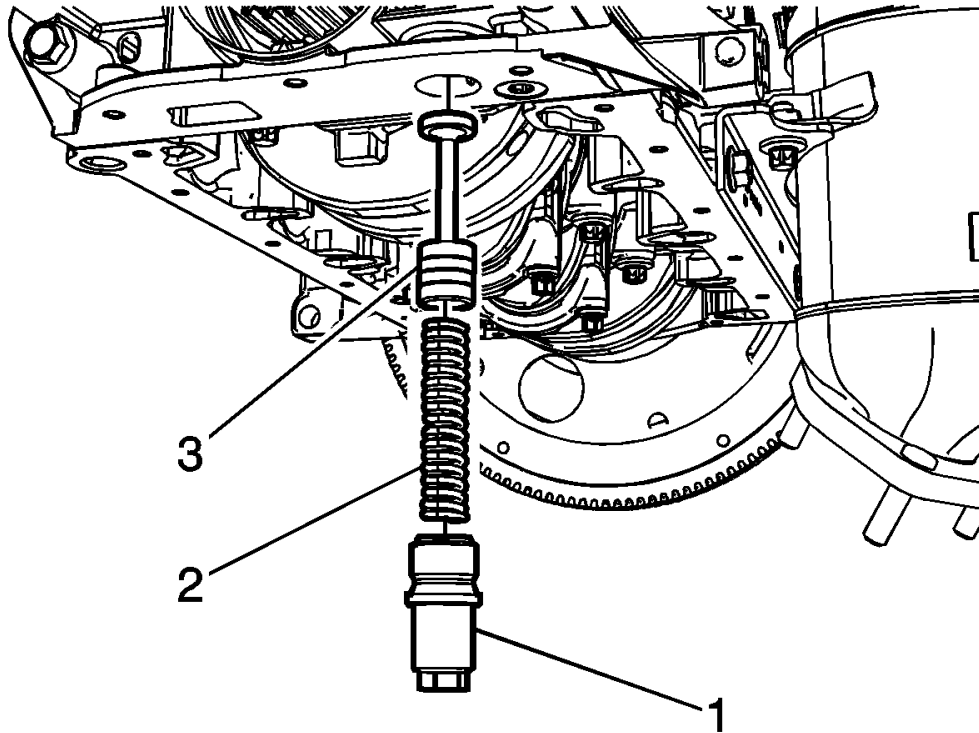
Oil Pressure Relief Valve Plug, Spring & Piston (Primary)
